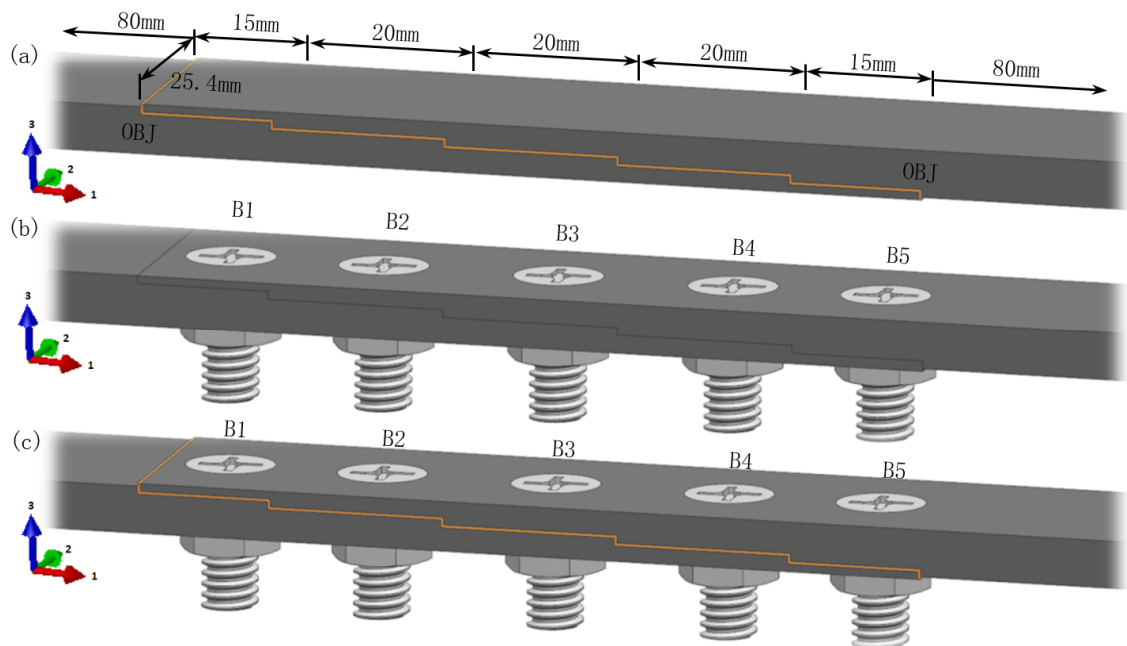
Three major geometry configurations; (a) Configuration 2.1 – Bonded Step Lap Joint; (b) Configuration 2.2 – Bolted Step Lap Joint; (c) Configuration 2.3 – Hybrid Step Lap Joint with five Countersunk Bolts; B1-B5 = Bolt 1 – Bolt 5; bolts placed central of each step; OBJ – Outer butt joint where adhesive acts in tension
